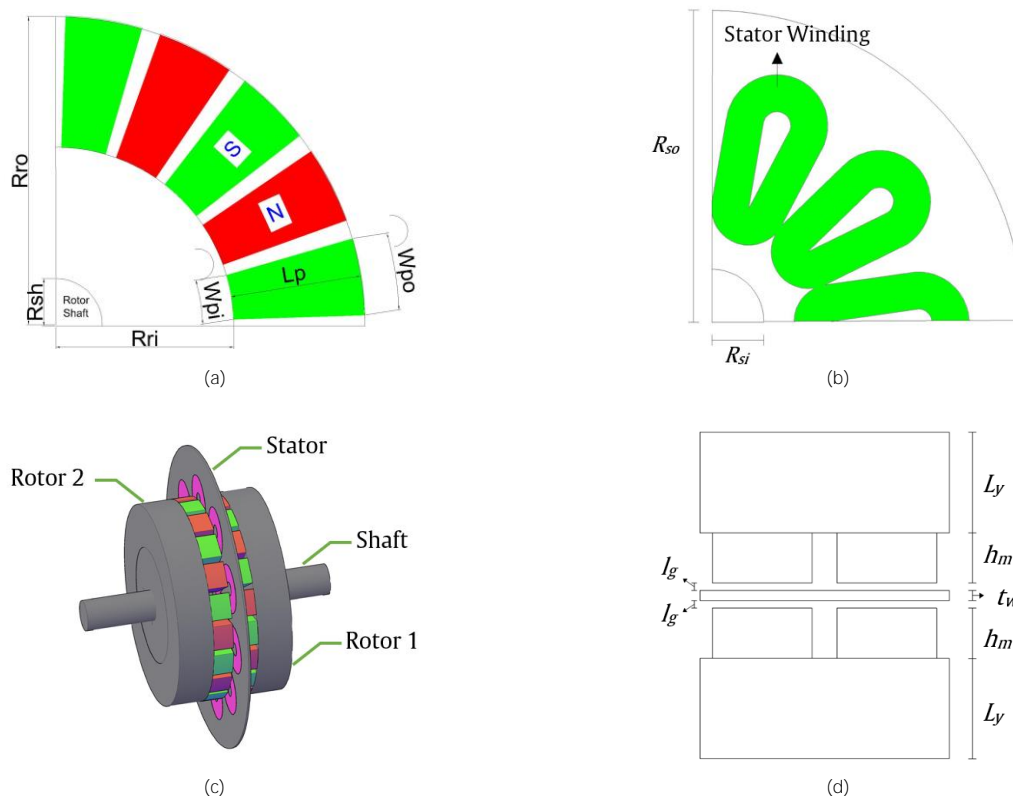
Generator dimensions: (a) rotor; (b) stator and its winding configuration; (c) three dimensional coreless AFPMG; (d) front view
